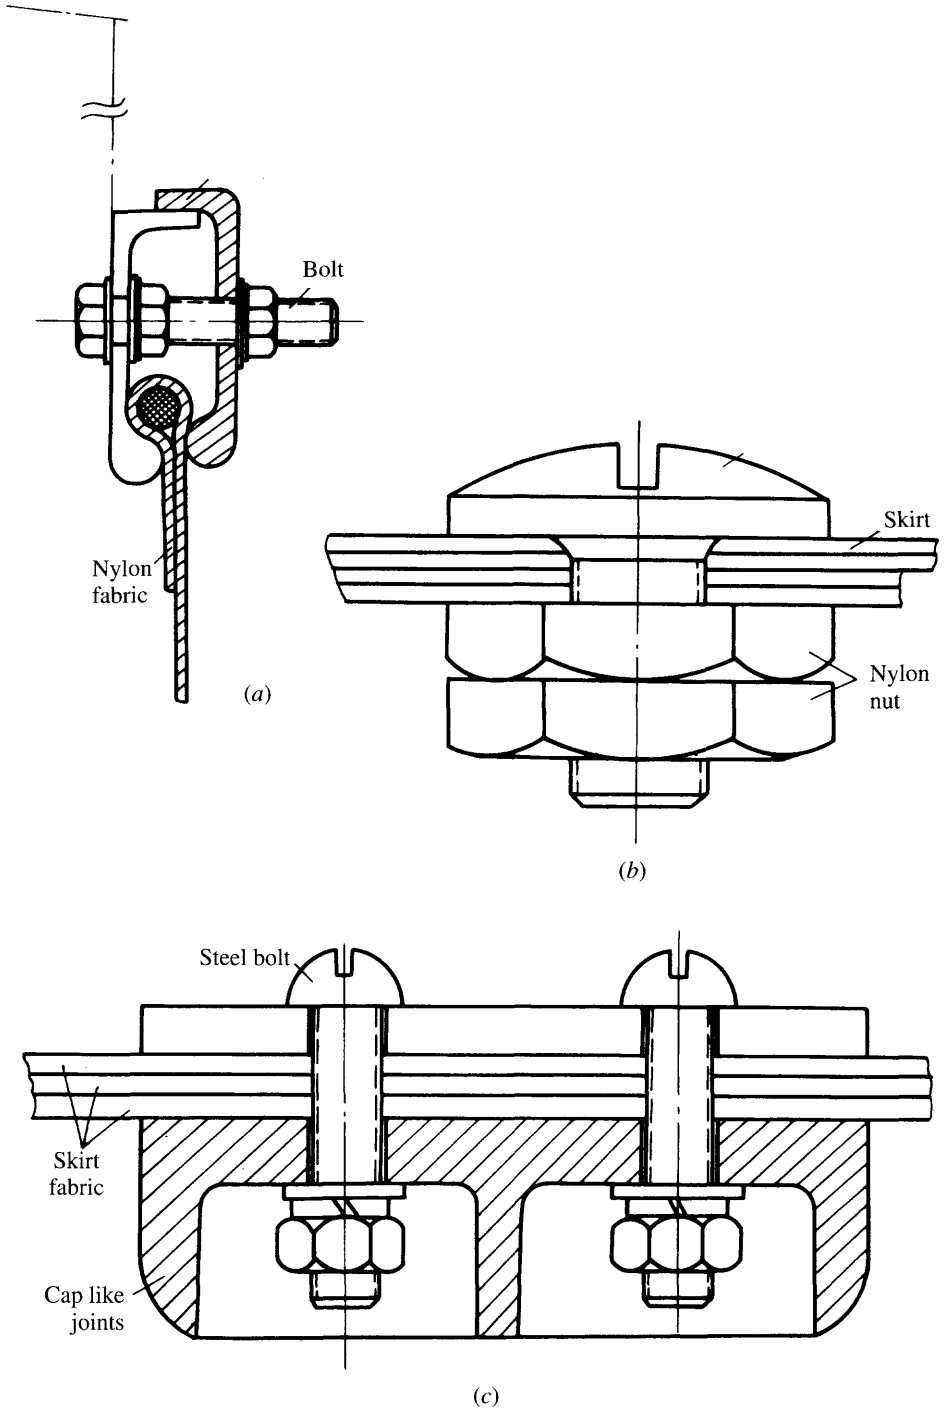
Several types of skirt joints. (a) Clamped joint for bag/hull; (b) nylon bolt for bag and finger panel constructions; (c) steel bolts and plates for bag/finger panels.
